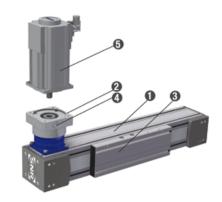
Drive assembly on Linear Axis with planetary gearbox
